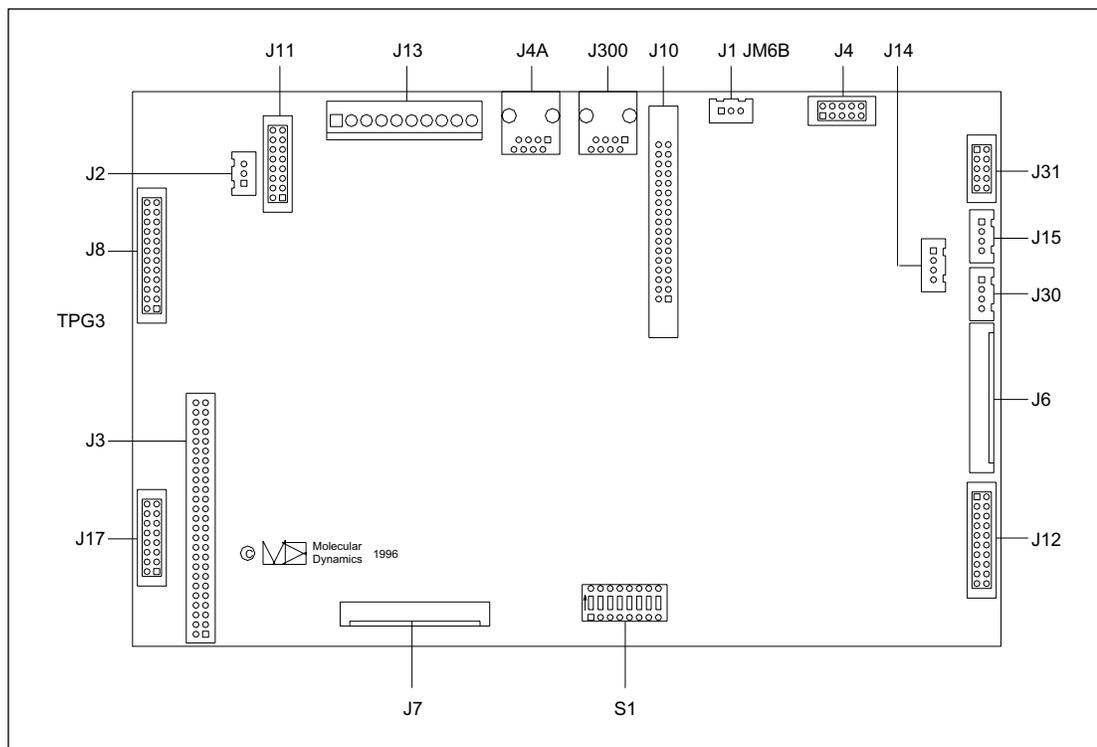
INTC Board (Later Model) Component Layout Diagram.
